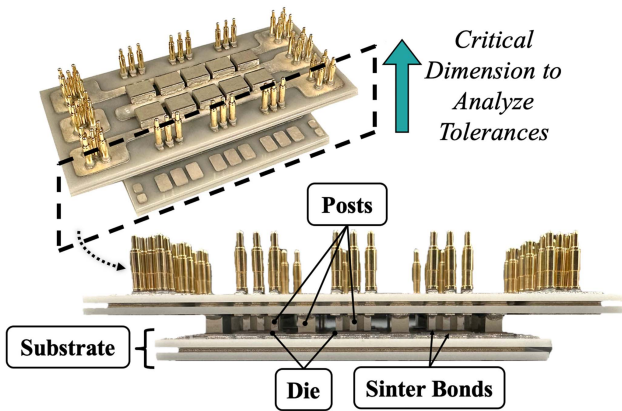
Critical dimensions and parts to conduct the statistical tolerance analysis for the MCPM.
